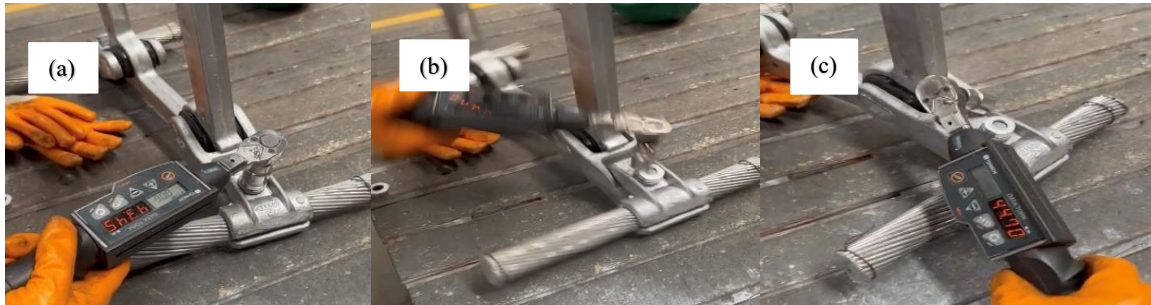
Torque testing sequence; (a) pre-fracture state, (b) moment of fracture, (c) post-fracture state
